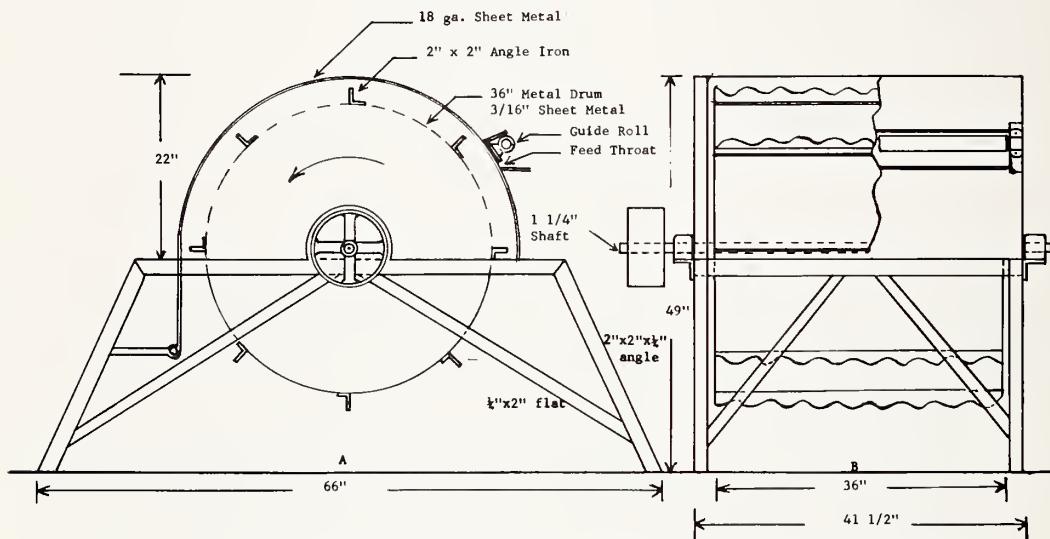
A lightweight fiber processing machine developed in the Agricultural Engineering Laboratories.
